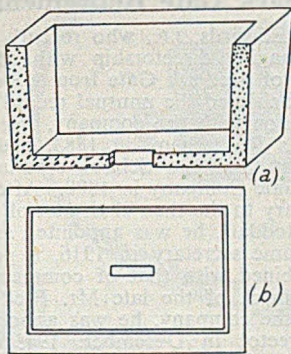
(a) Sectional Sketch and (b) Plan View of a Core for Forming the Feeding Head when Casting Aluminium-bronze.
